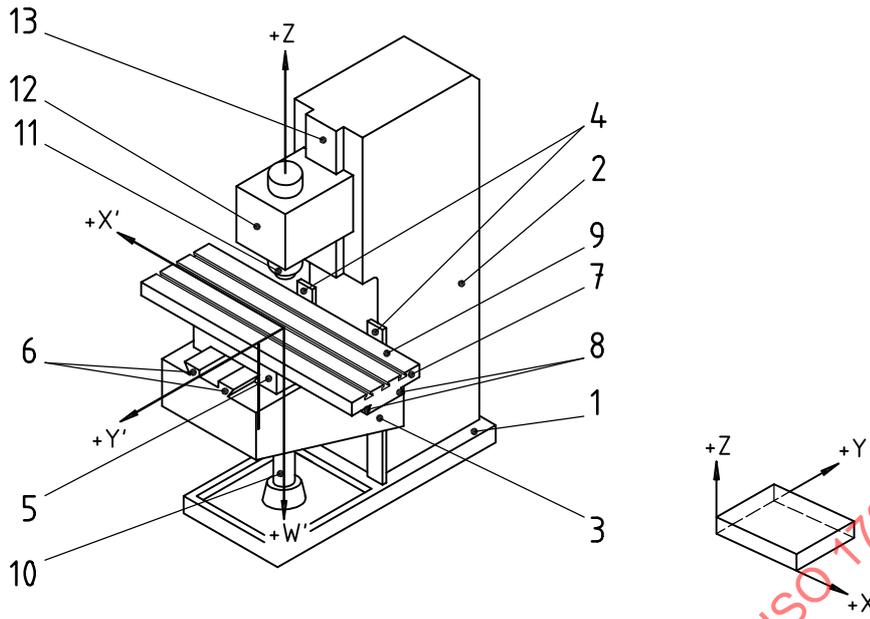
Milling machine with table of variable height, with vertical spindle and a sliding vertical saddle spindle head
